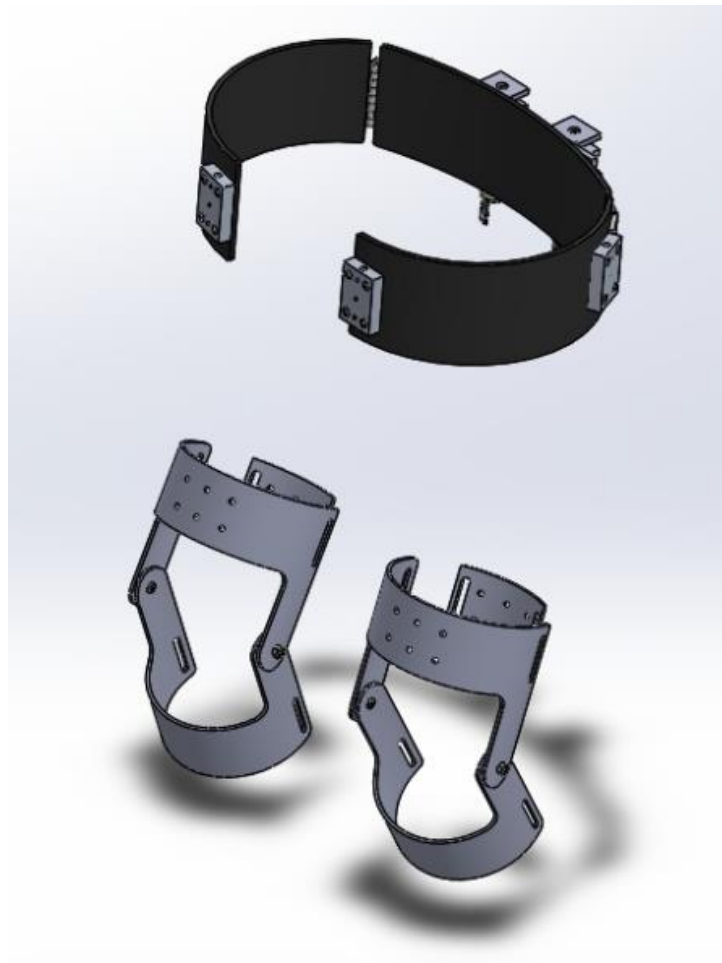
Full Assembly of Exoskeleton in SolidWorks
